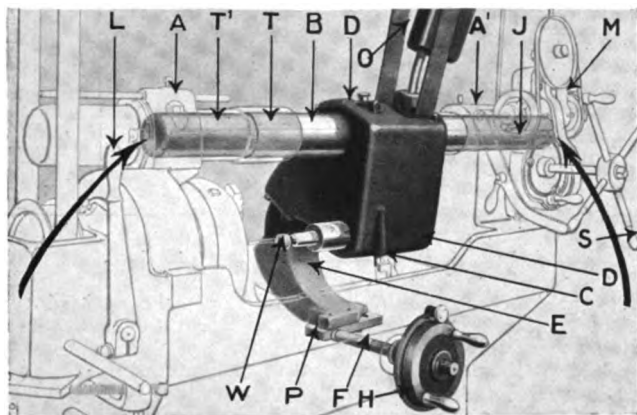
Wheel Slide Control of Bryant Grinding Machines
